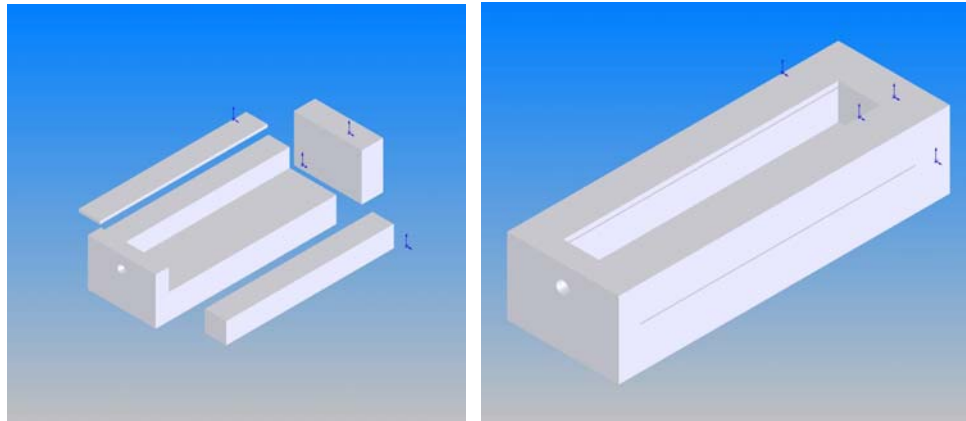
Assembly for the mold (left) and final assembly for the actuator fabrication (right)
